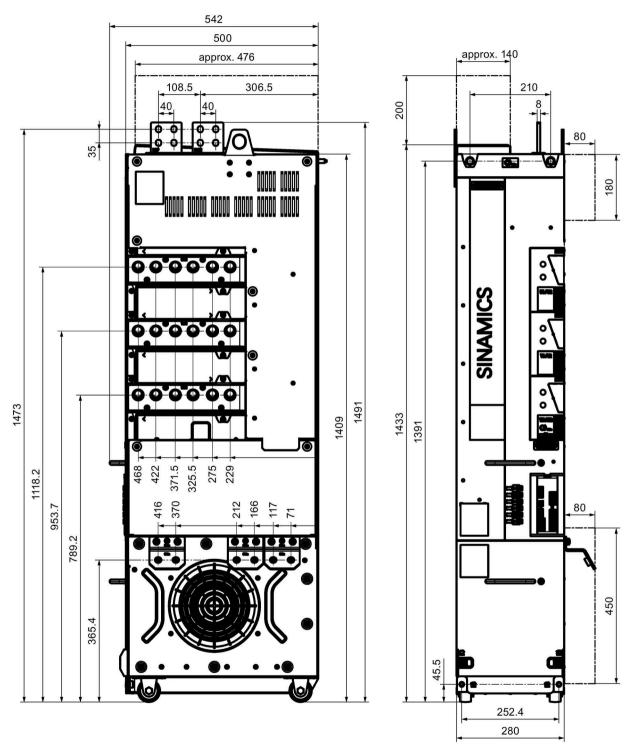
Dimension drawing, Motor Module Chassis-2 format, frame size FS4, FS4+ Side view, front view
